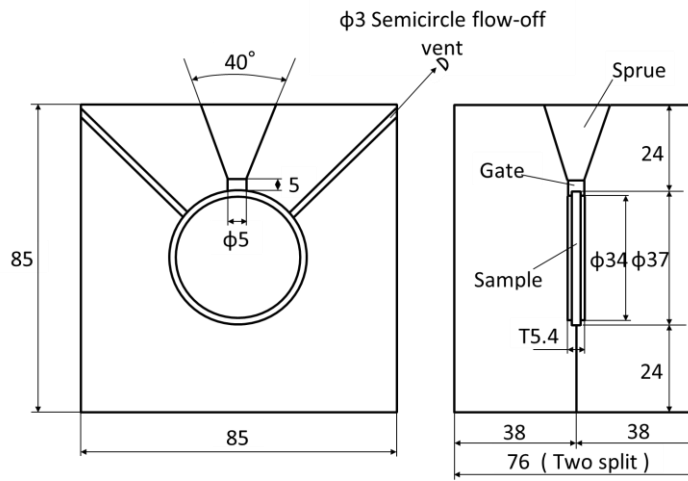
Shape and dimensions of the medium-carbon steel permanent mold (unit: mm).
